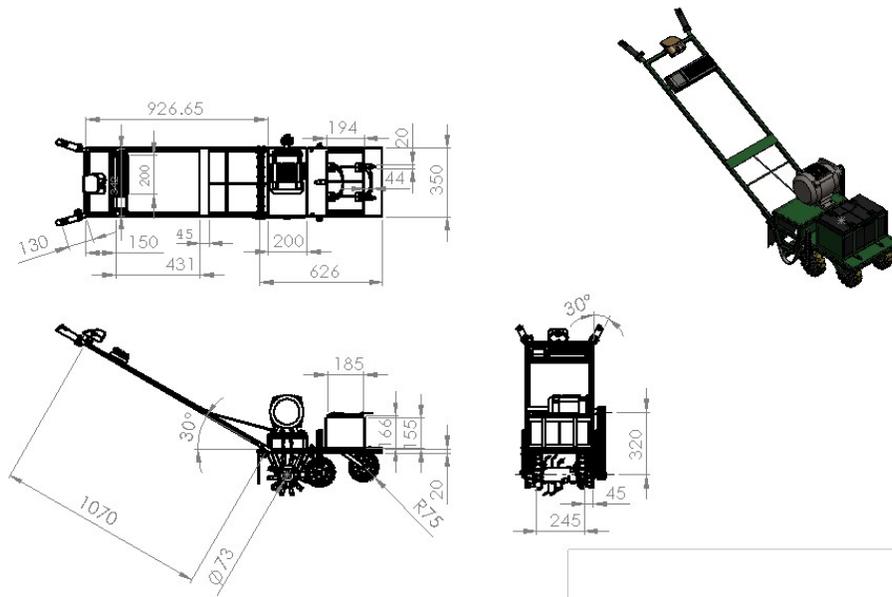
Battery operated dry land rotary weeder with dimension (mm)
